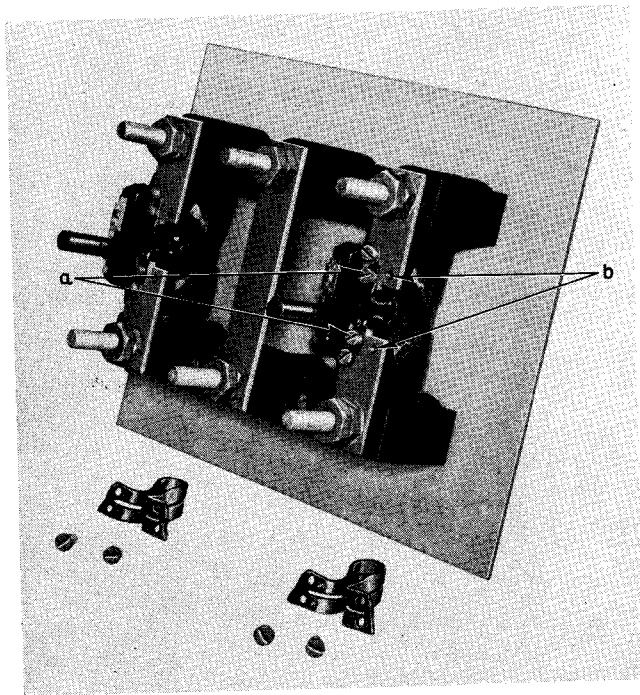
Install single heaters, code CA through CJ, using holes "a" as shown. Install double heaters (shown below relay) using holes "a" and "b". Be sure the looped portion enters the recess in the relay.
